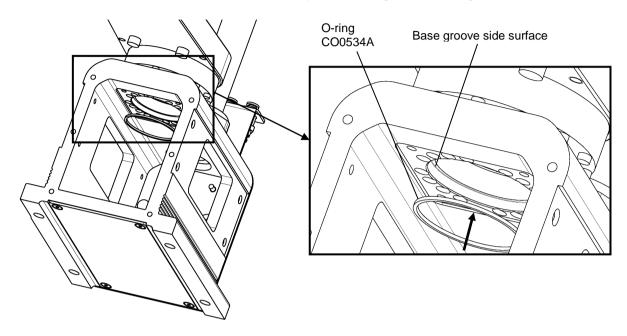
Mounting axis 1 base side O-ring (KHL-300, KHL-400)
